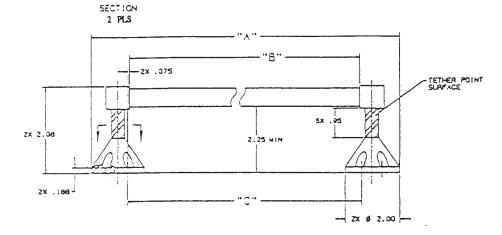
HANDRAIL/HANDHOLD CROSS SECTION (GROUND INSTALLED)
